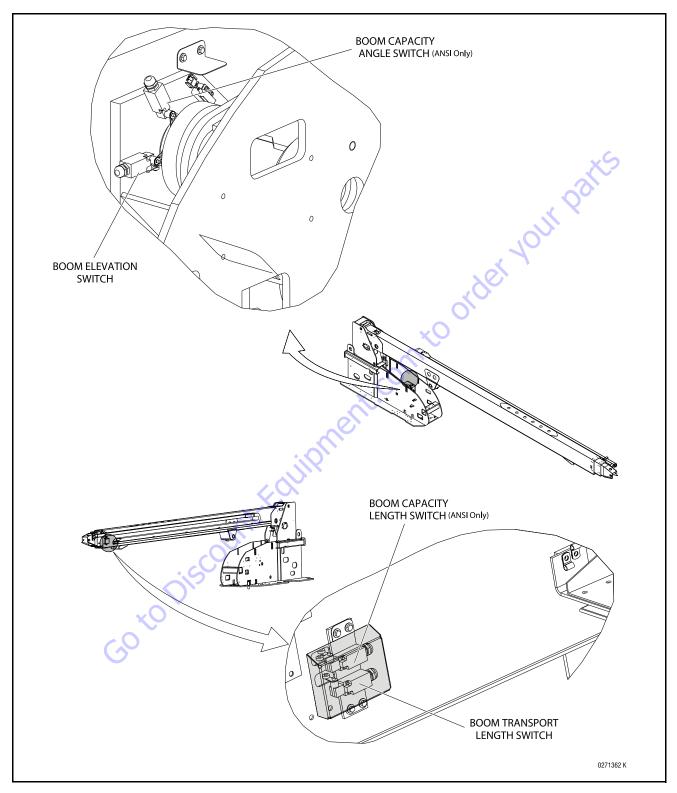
Elevation, Dual Capacity, and Transport Switch Installation - 860SJ
